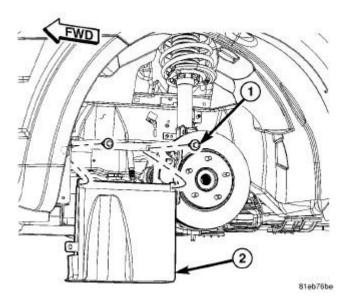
Left Lower Splash Shield Courtesy of CHRYSLER GROUP, LLC
